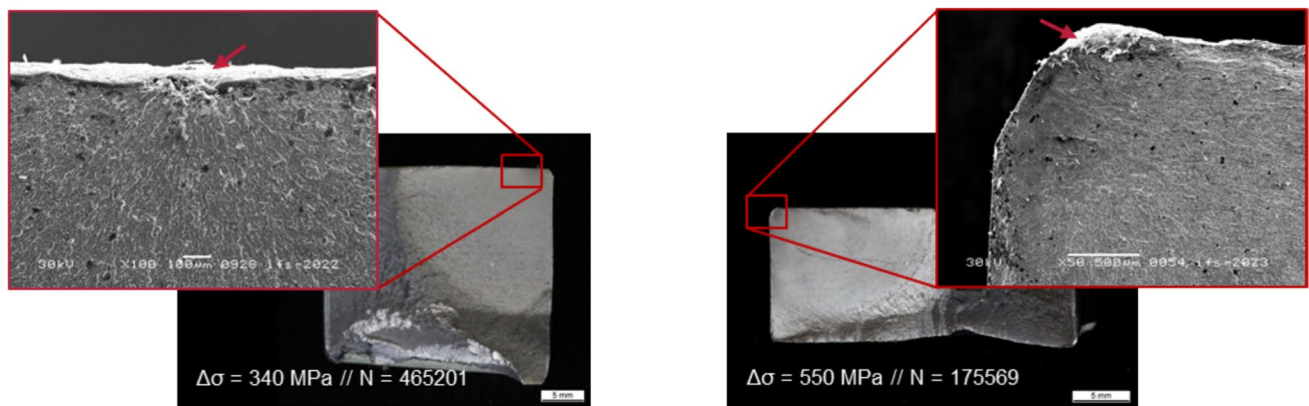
Fracture surfaces of E40 specimen (left) and S690 material (right), crack initiation at sheet metal surface (left) and next to chamfer of edge treatment (right)
